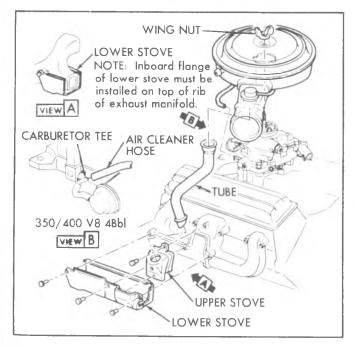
A-11V--Carburetor Heat Stove Assembly—Small V-8
